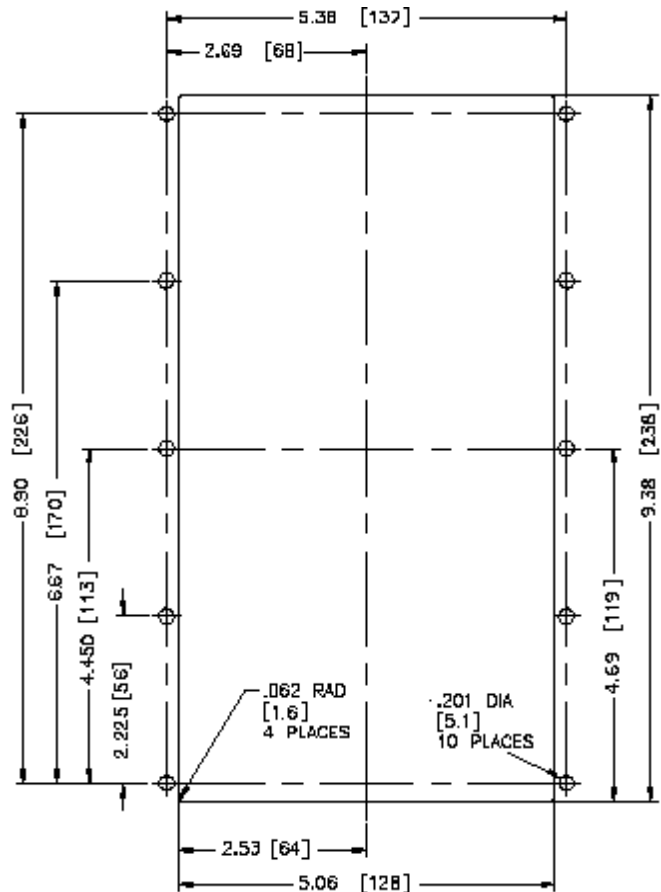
Chassis Cutout Dimensions (inch [mm])
